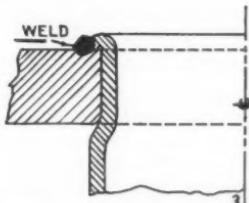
Cross-section drawing of a flue applied with copper ferrule, but which has been welded.
